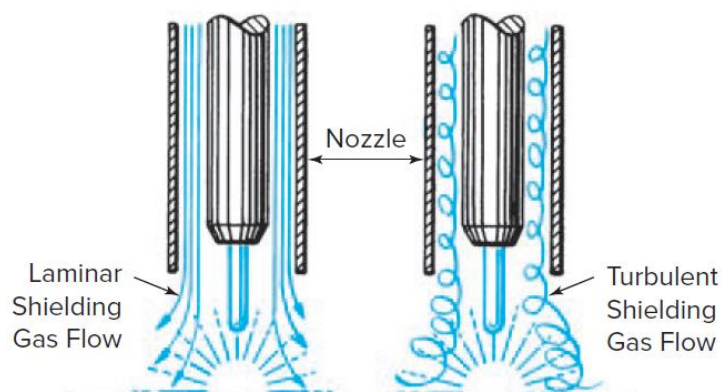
Shielding gas flow in MIG/MAG welding process.
